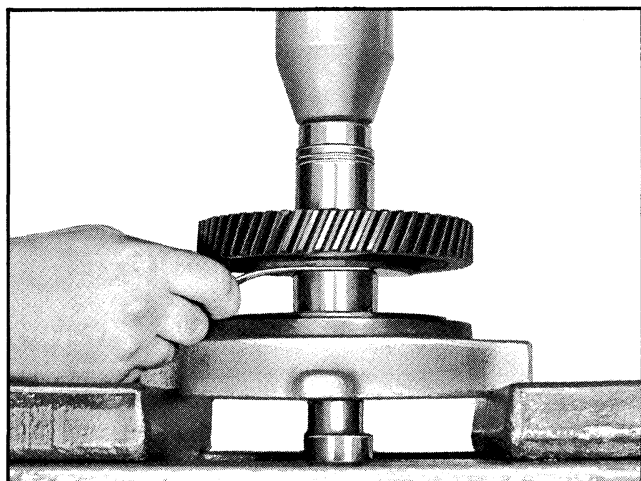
Installing Camshaft Timing Gear and Checking Thrust Plate End Clearance
